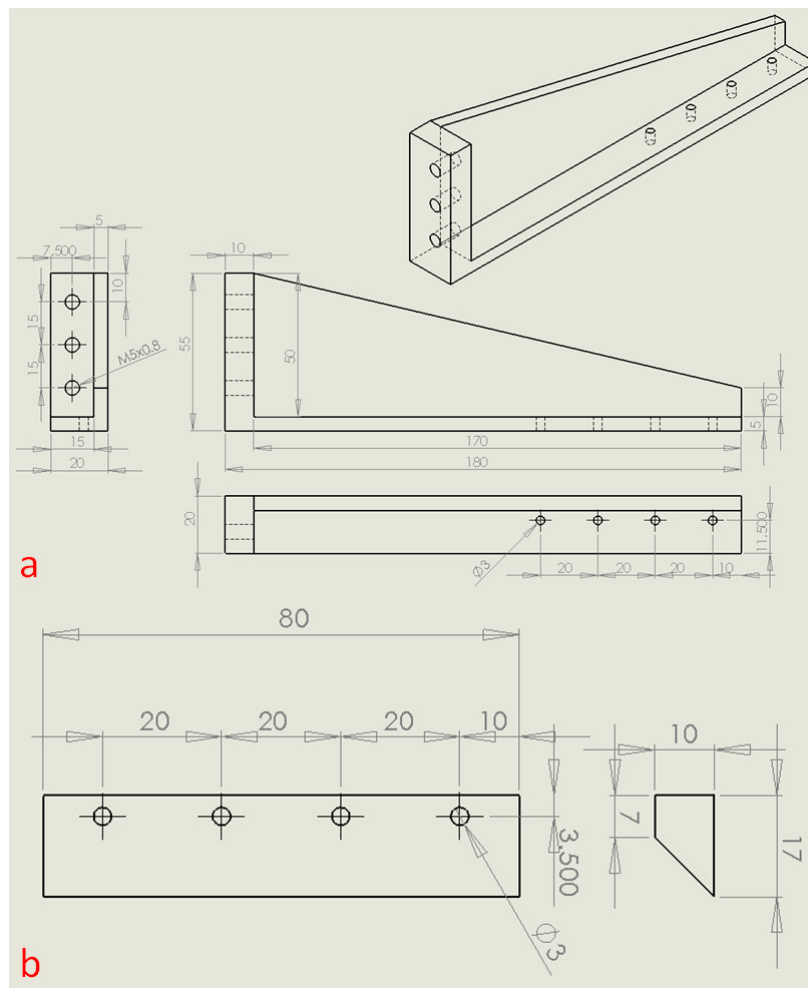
CAD drawings of (a) left build platform support arm and (b) build platform clamp for custom MSL system (dimensions in mm)
